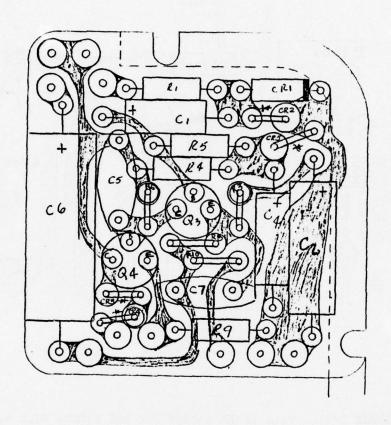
P.C. BOARD LAYOUT FOR THE A7200A SERVO AMPLIFIER ASSEMBLY
